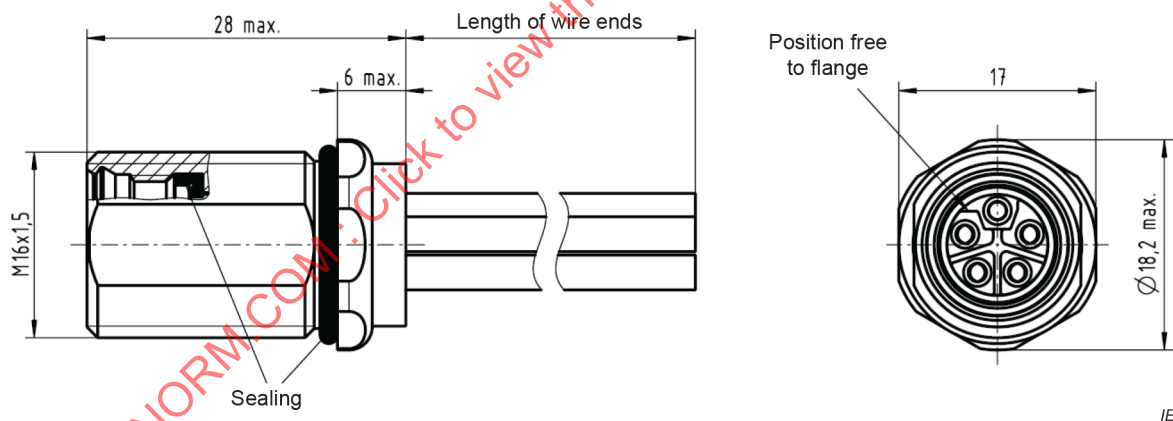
Fixed connector, female contacts, with M12 screw locking and inner push-pull locking, with wire ends, single hole rear mounting thread M16 × 1,5
